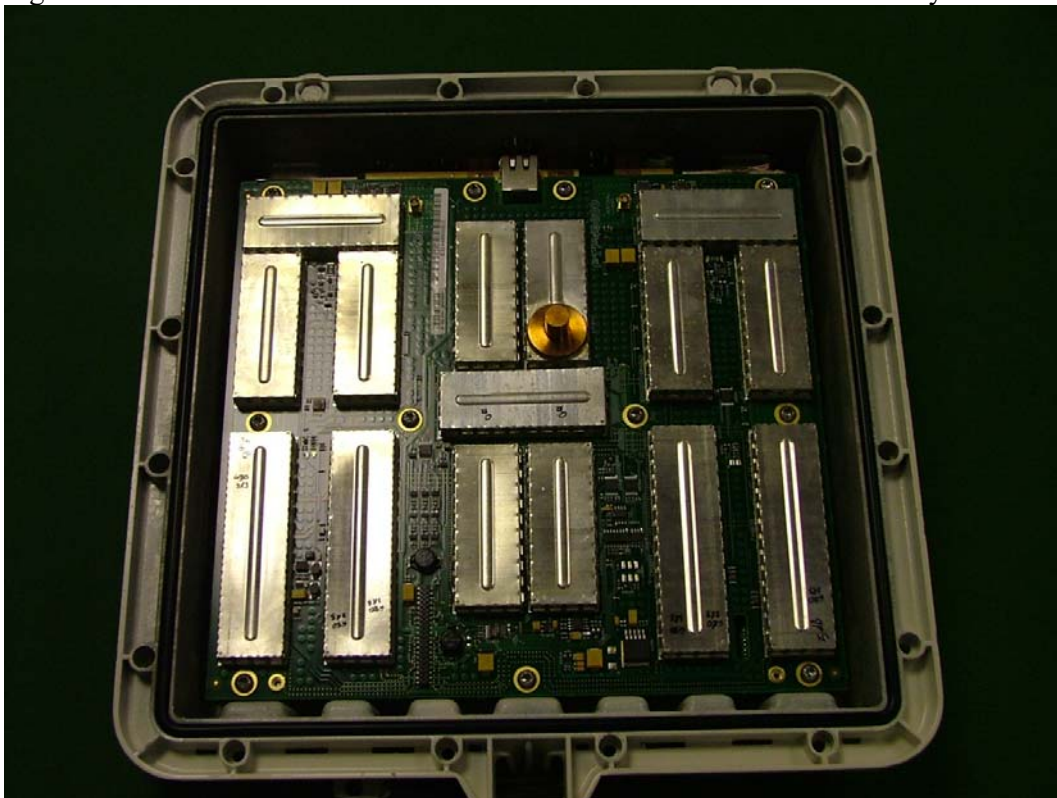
PTP49600 Connector Plate removed to show internal assembly
